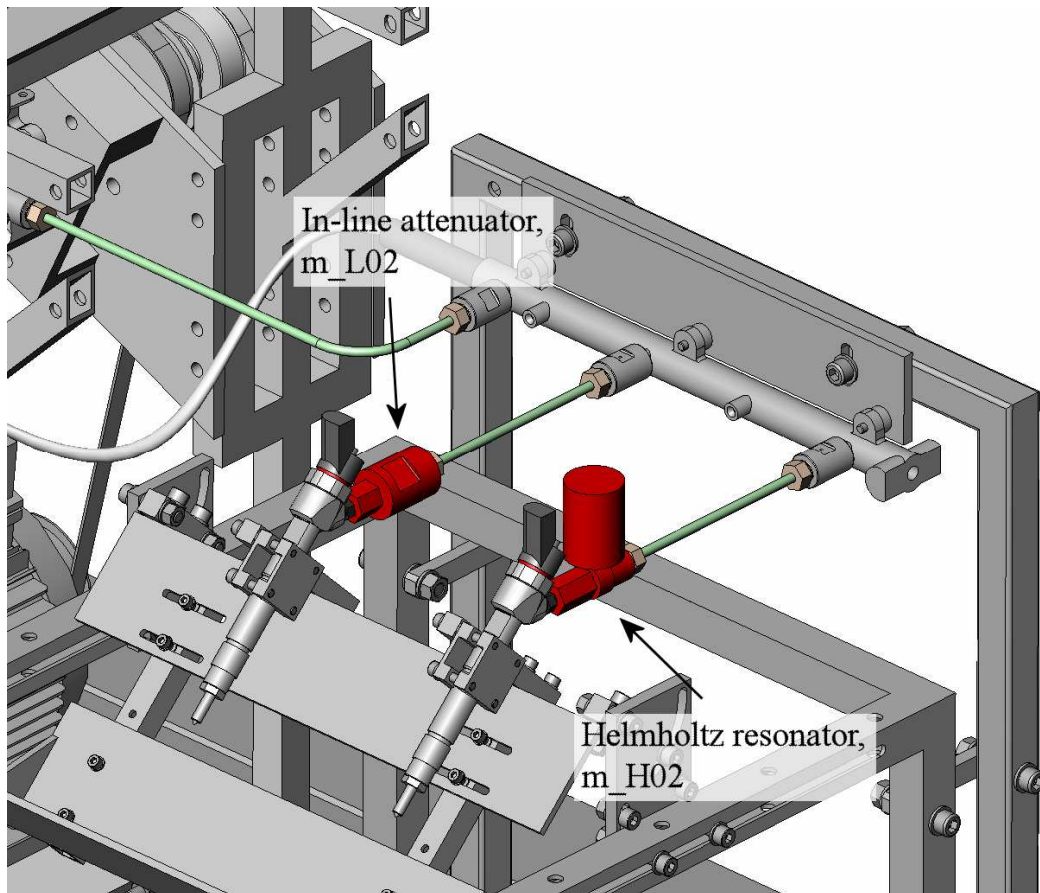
CAD drawing of CR test bench with  $m_{L02}$  and  $m_{H02}$ .
